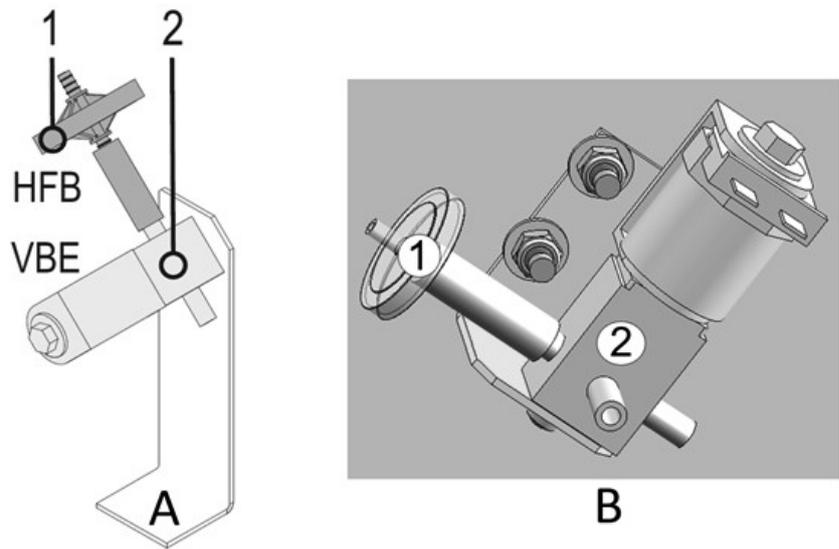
Valve block HDF online, old version A on UF sub rack, new version B on back door.
